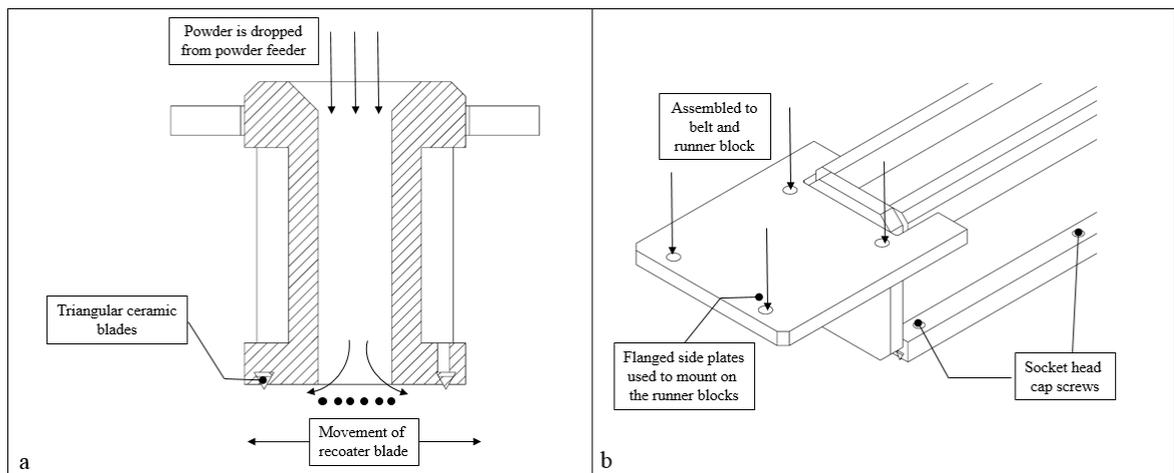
a) Recoater blade cross section b) Isometric partial view.
